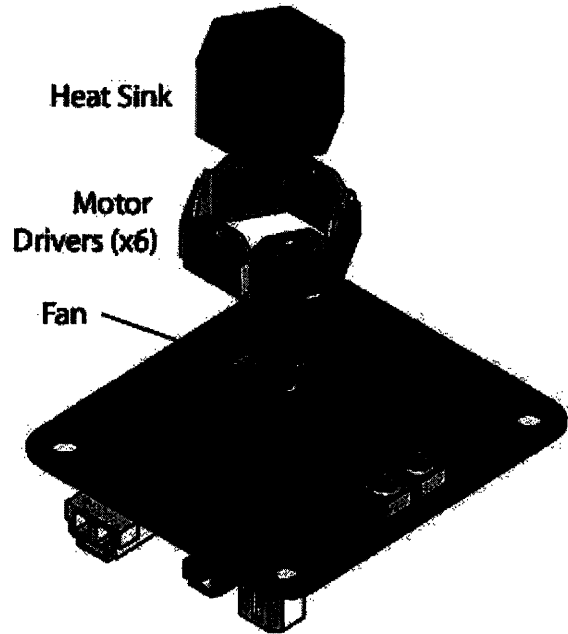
Exploded View of the 3rd Generation Motor Driver Cooling Solution
